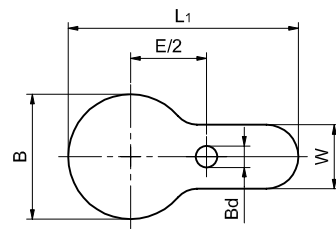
Blanks, Paddle Blanks, Paddle Spacer
